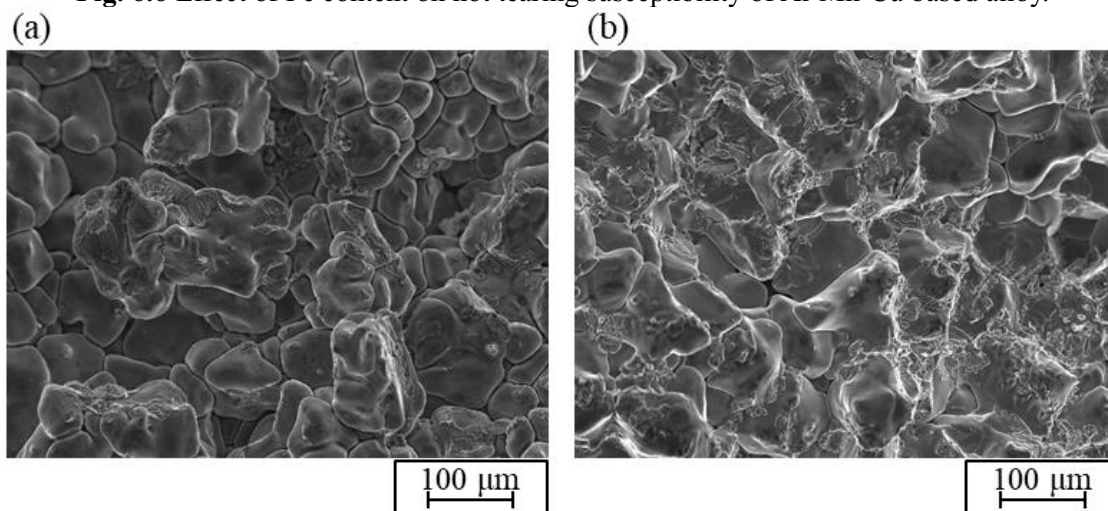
Fracture surfaces after I-beam tests for (a) Al-Mn-Cu-0.15Fe, (b) Al-Mn-Cu-0.4Fe.
